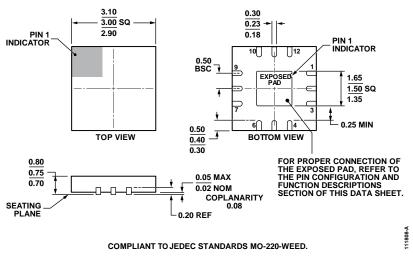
12-Lead Lead Frame Chip Scale Package [LFCSP] 3 mm × 3 mm Body and 0.75 mm Package Height (CP-12-5) Dimensions shown in millimeters
